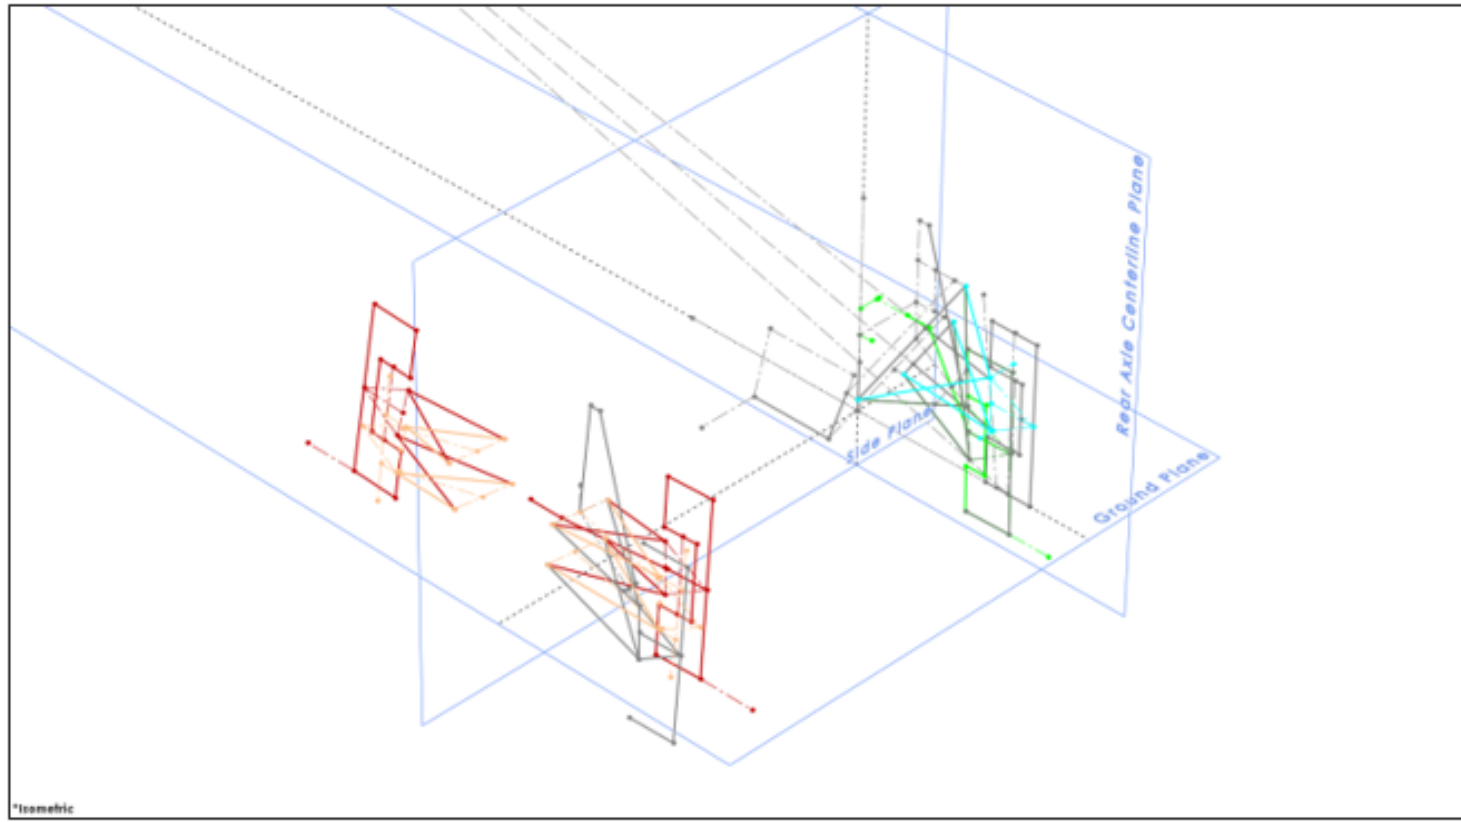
Suspension and Steering Kinematics & Shock Mounting determined using Solidworks
